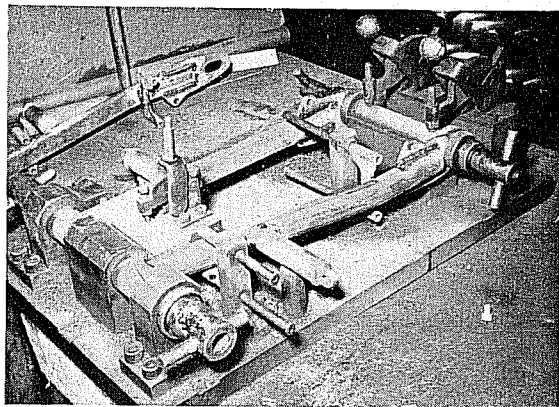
(above).—Rear-fork components jugged for welding
